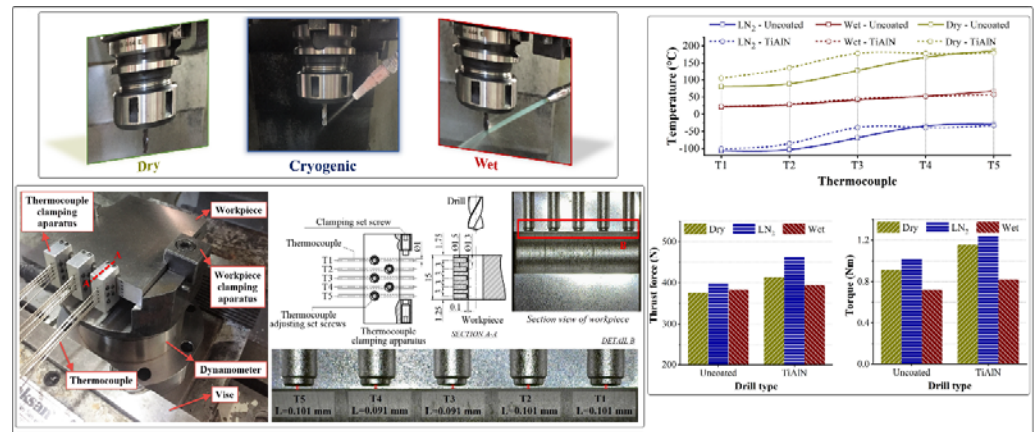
Figure A. Cutting conditions, thermocouple connection setup, and the obtained cutting temperature, torque and thrust force results.
